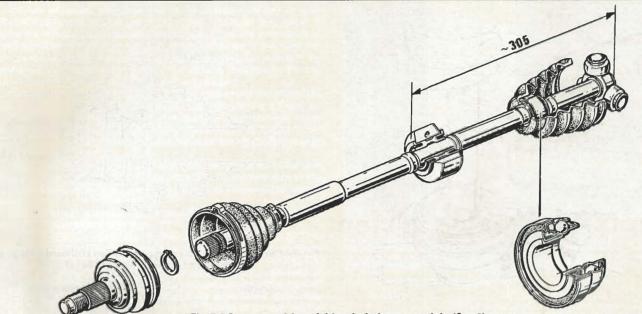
Correct position of driveshaft damper weight (Sec 9)
